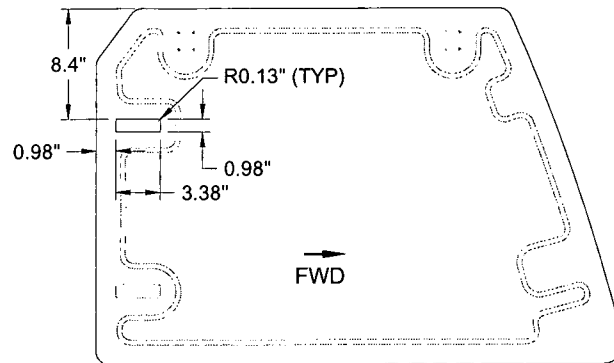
(a). D3186-1 SPACEPOD DOOR LATCH CUTOUT
